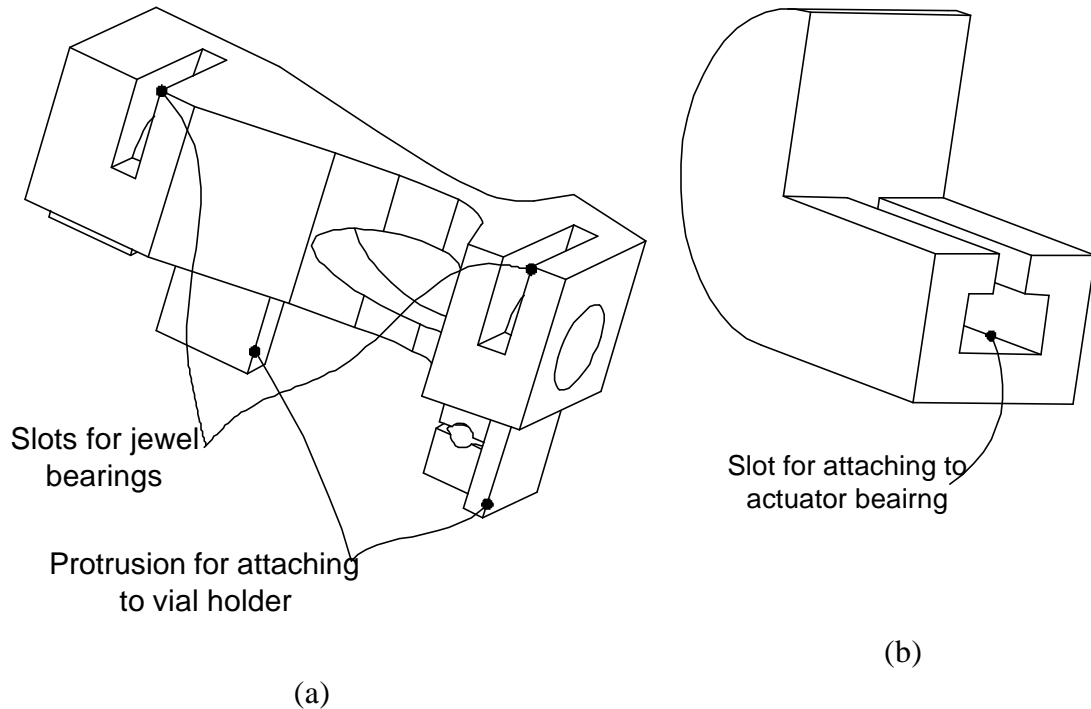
(a) Actuator Bearing (b) Wire Return Guide
